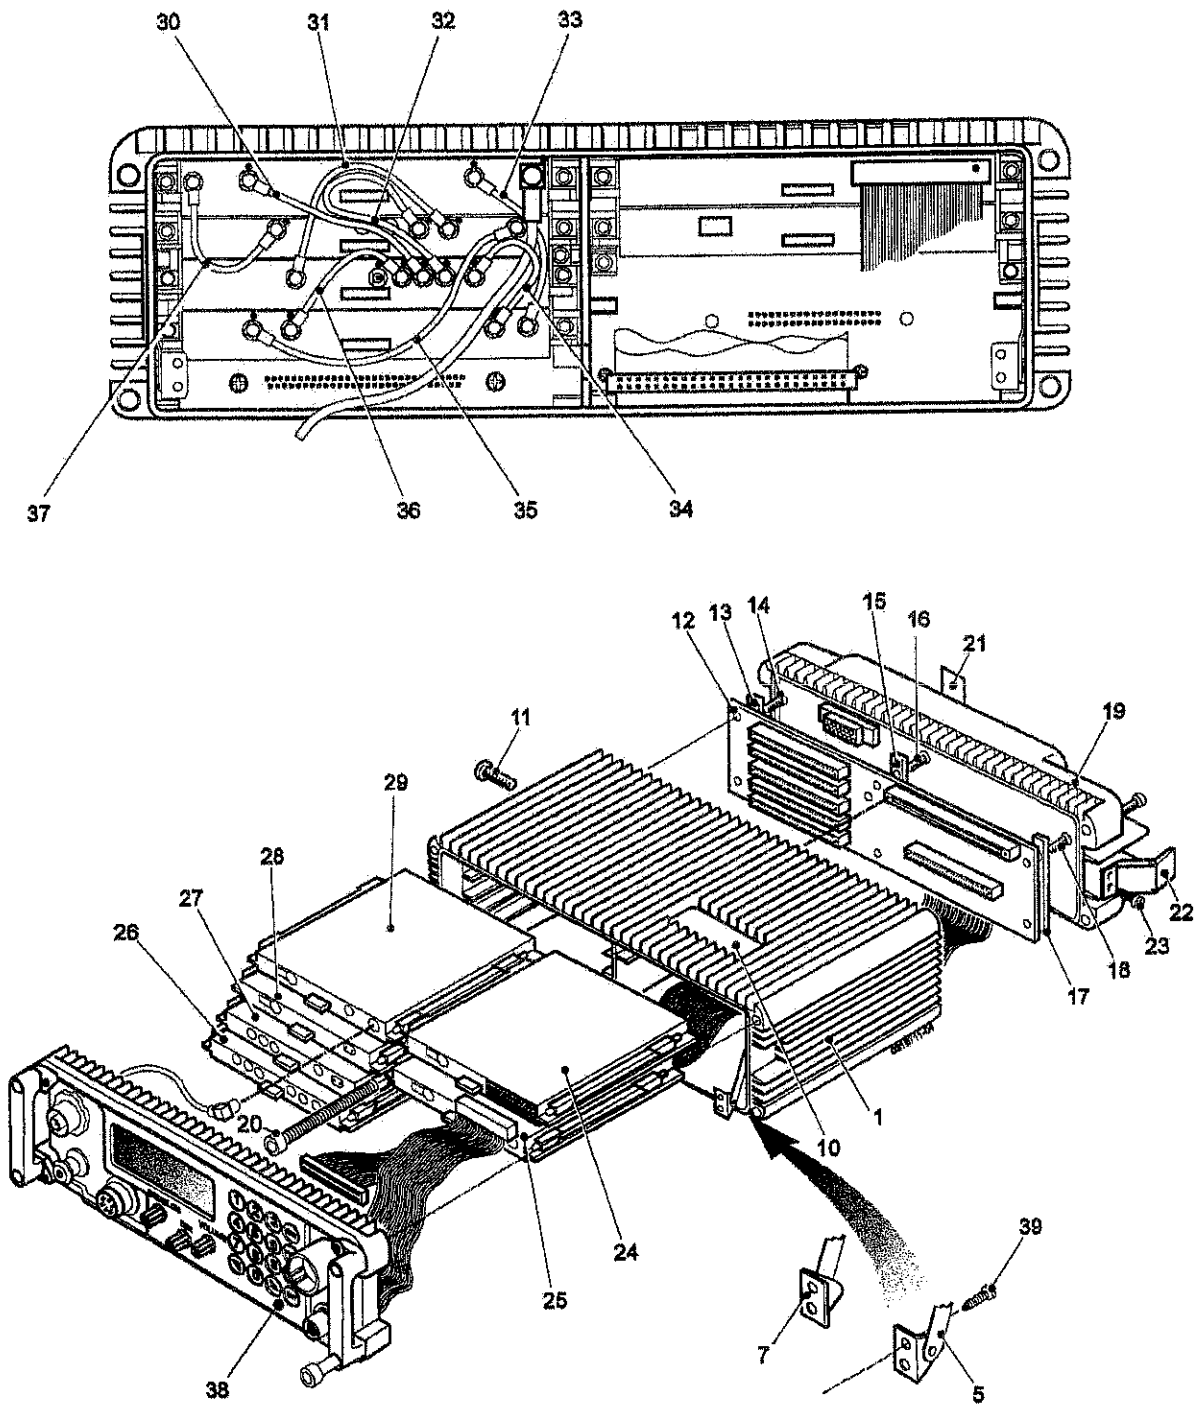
UK/RT 346 receiver/transmitter (R/T) unit assembly
